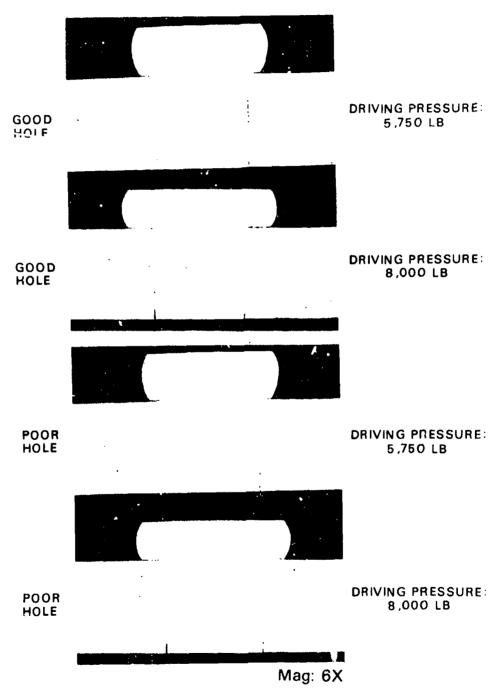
Photomacrographs of Sectioned 0.184-in. Diameter (D) 7050 Slugs Driven With 1.5D and 1.7D Diameter Flat Heads in 0.190-in. 7075-T6 Sheet.
